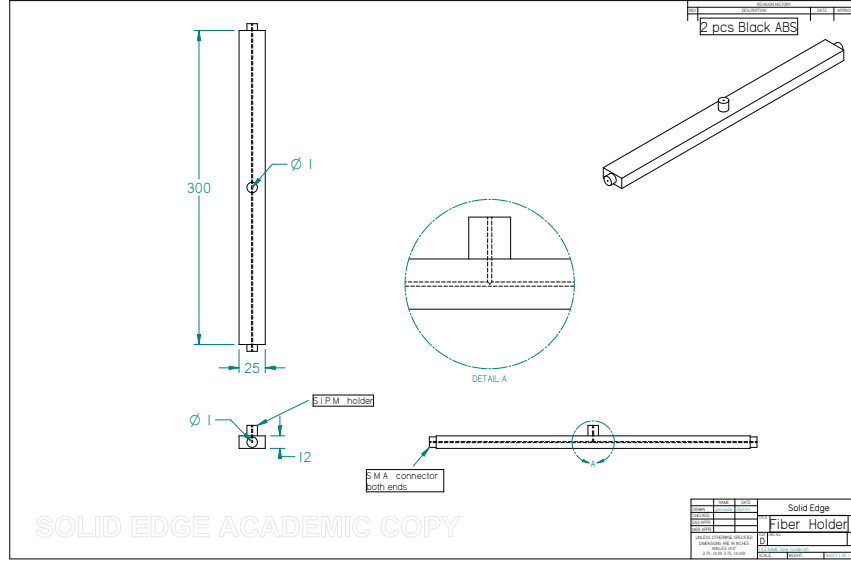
Details of the fiber holder for the PDE measurements (dimensions in millimeter). Picture courtesy of Derek Gervais. (original in color)
